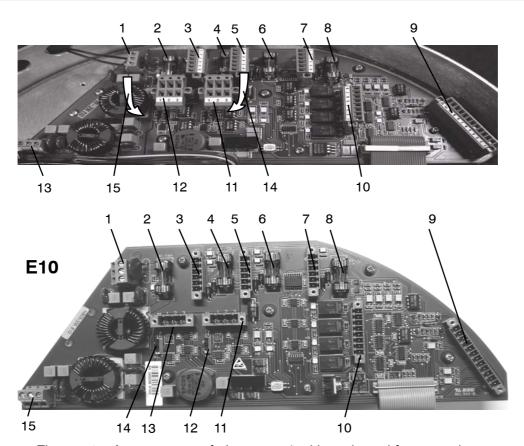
Arrangement of plugs, terminal boards and fuses on the Connection PCB.
